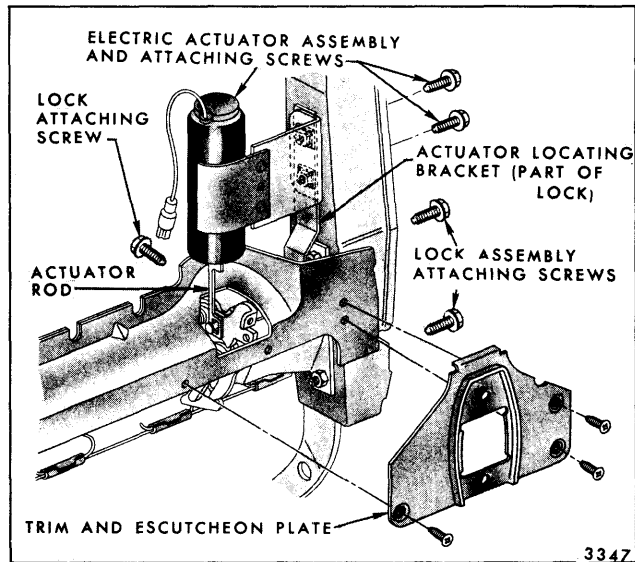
Seat Back Lock and Electric Acuator Assemblies—Cadillac Two-Door Styles with Standard Full Width Seats
